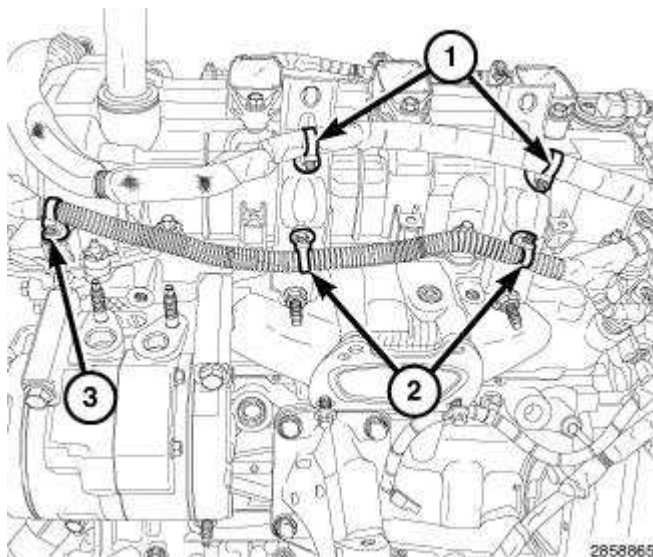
Starter Wire Harness Retainers, Main Wire Harness Retainer & Manifold Support Bracket Retainers
